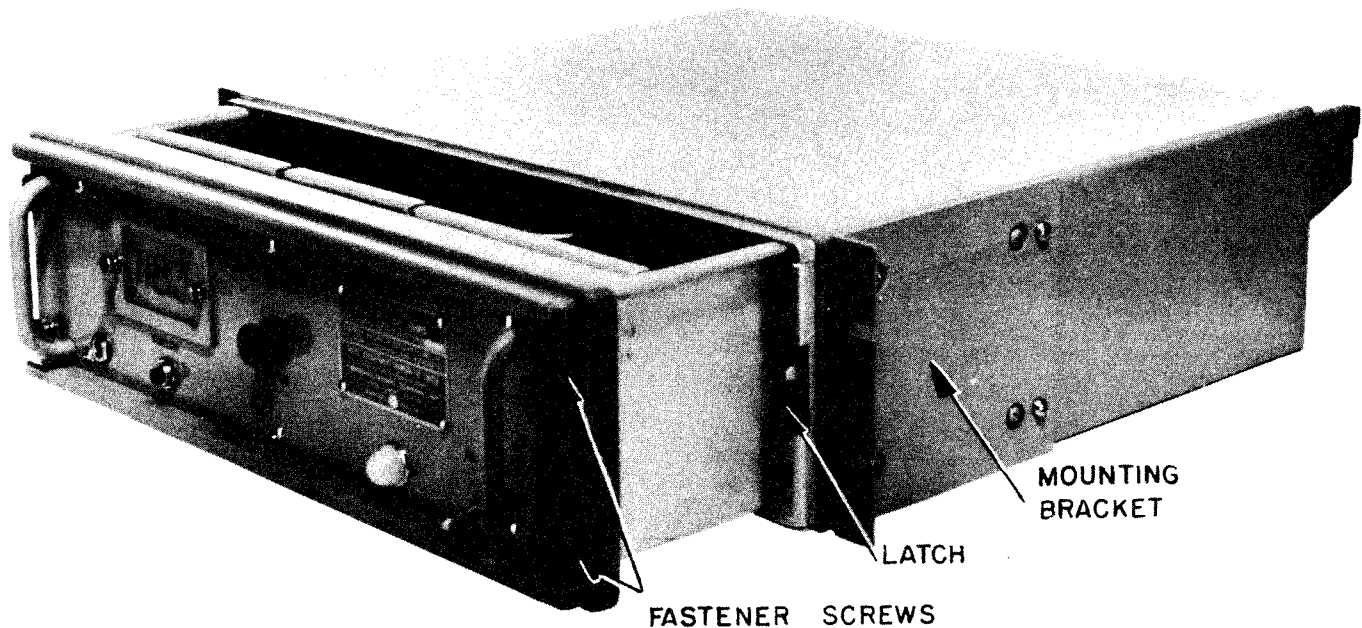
Relay Rack Mounting, Cabinet Side Lock Operation
